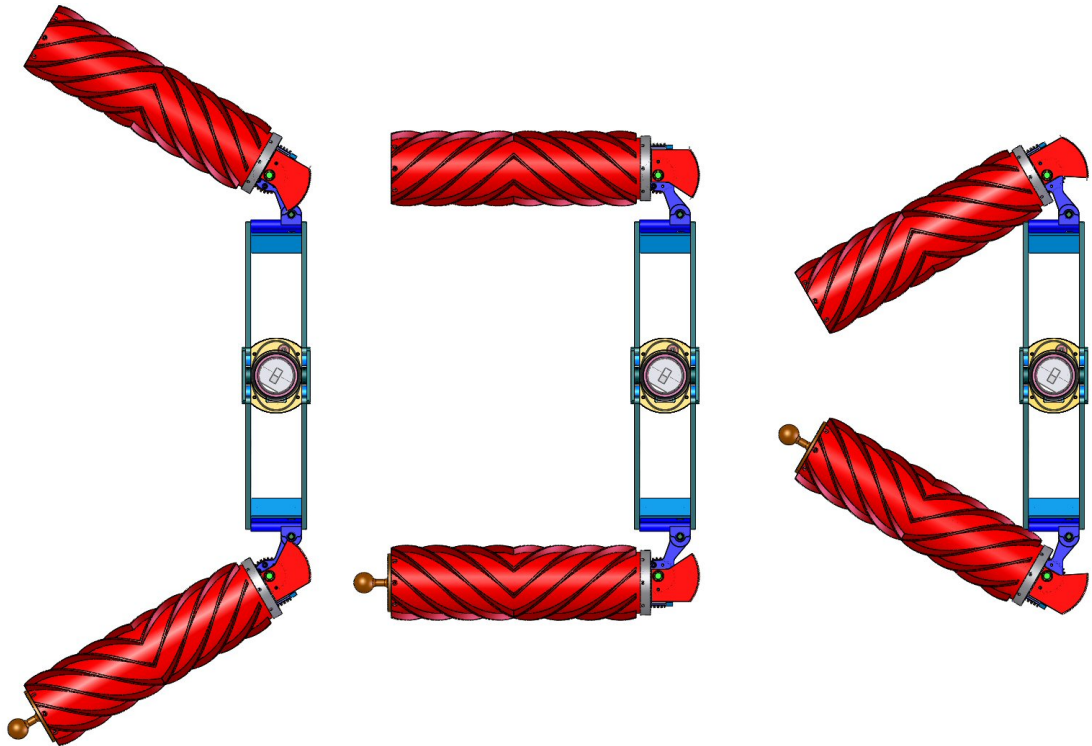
Possible steering configurations: toed-out (left), straight ahead (center) and toed-in (right)
